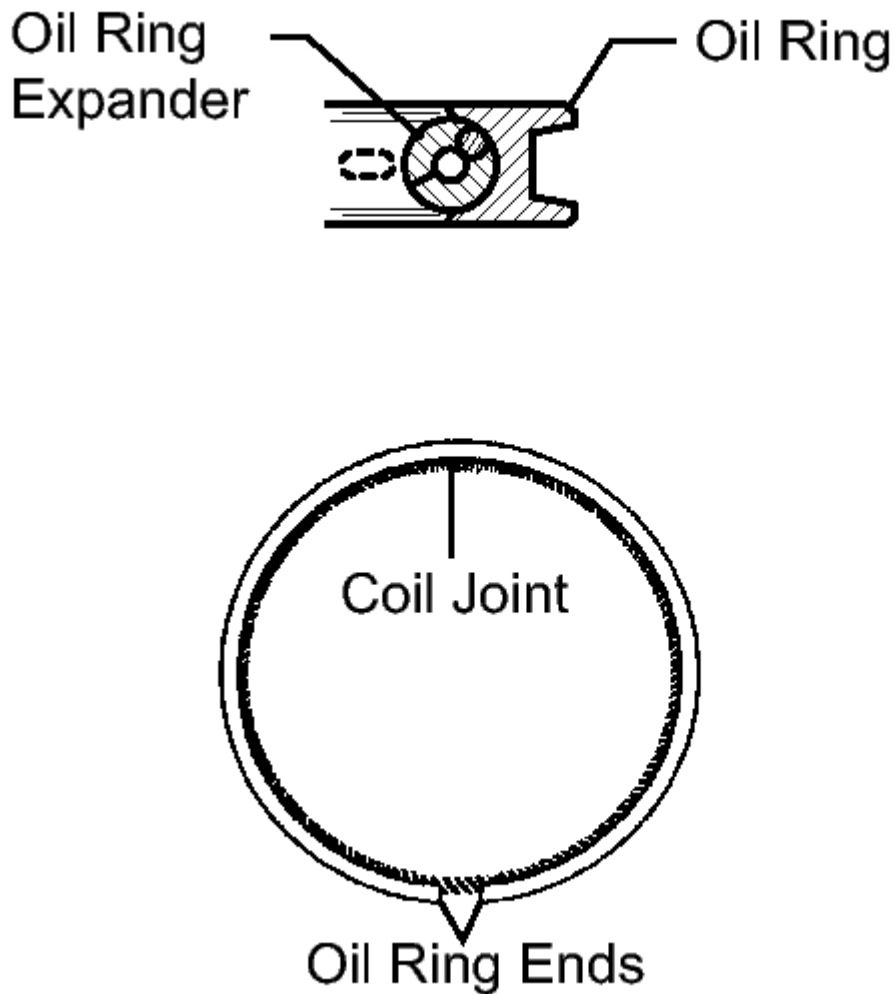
Identifying Oil Ring Expander & Oil Ring Rail
